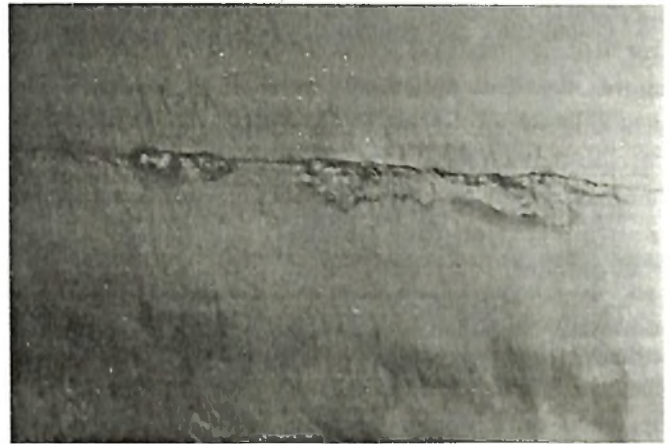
Corrosion initiated because slag was not completely removed from around a weld made with a coated electrode
